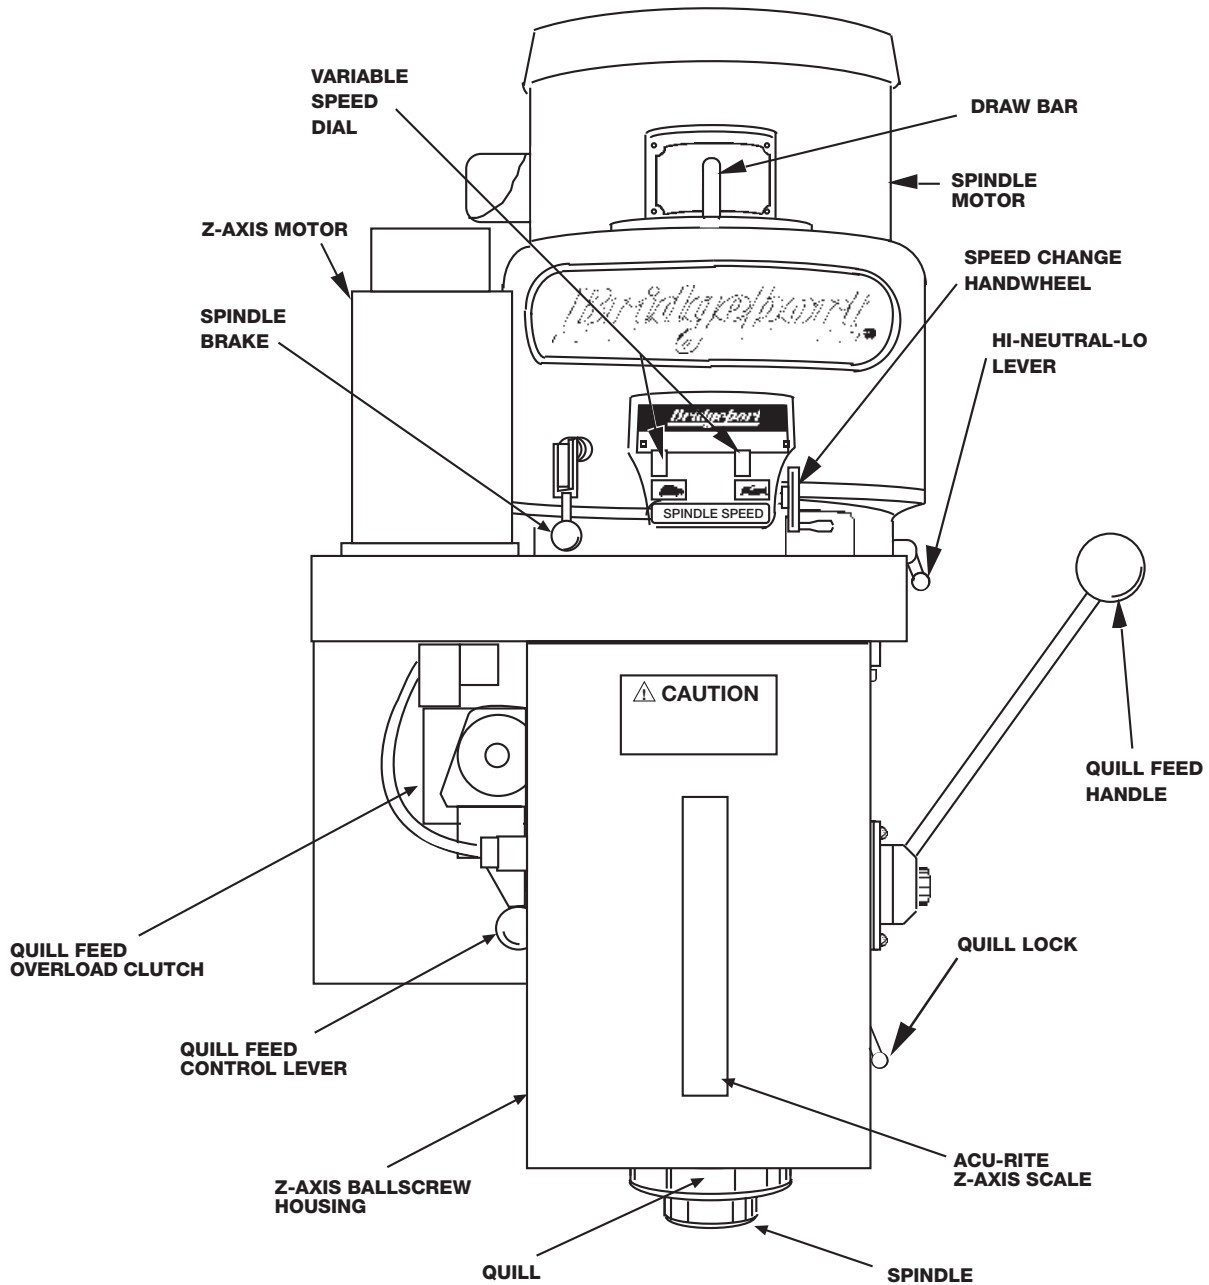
Basic EZTRAK 3-Axis Head Controls and Components
